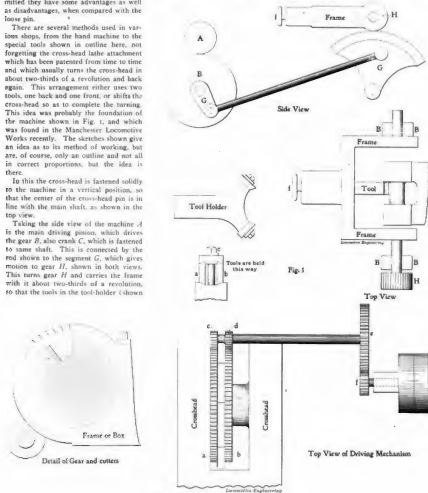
TURNING SOLID CROSS-HEAD PINS.
